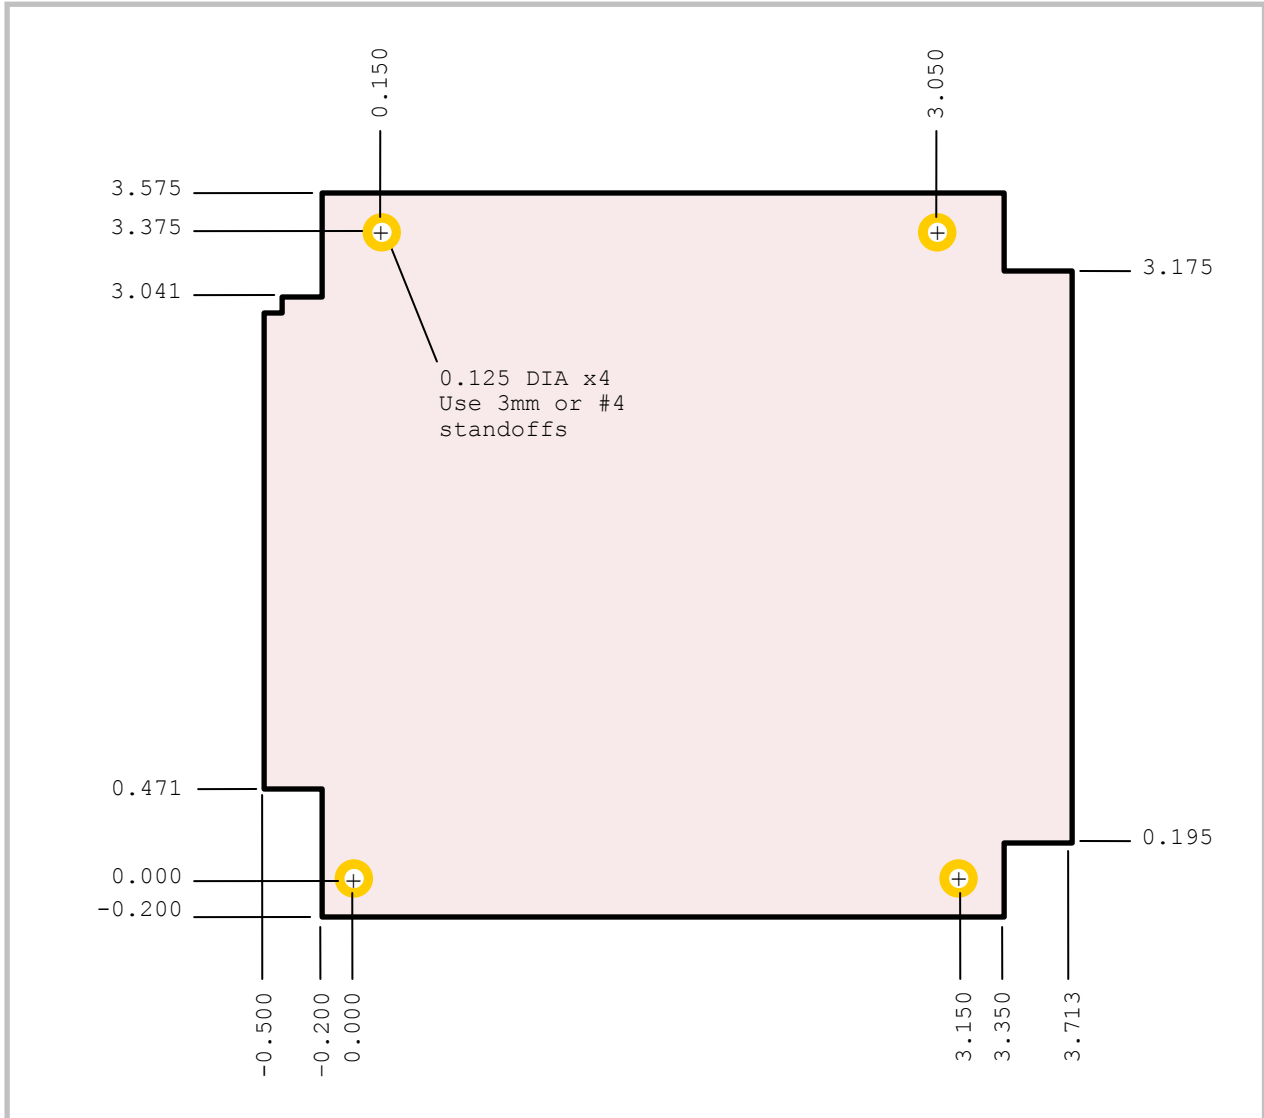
VL-EPM-35 Top Board Dimensions and Mounting Holes (Top View)
